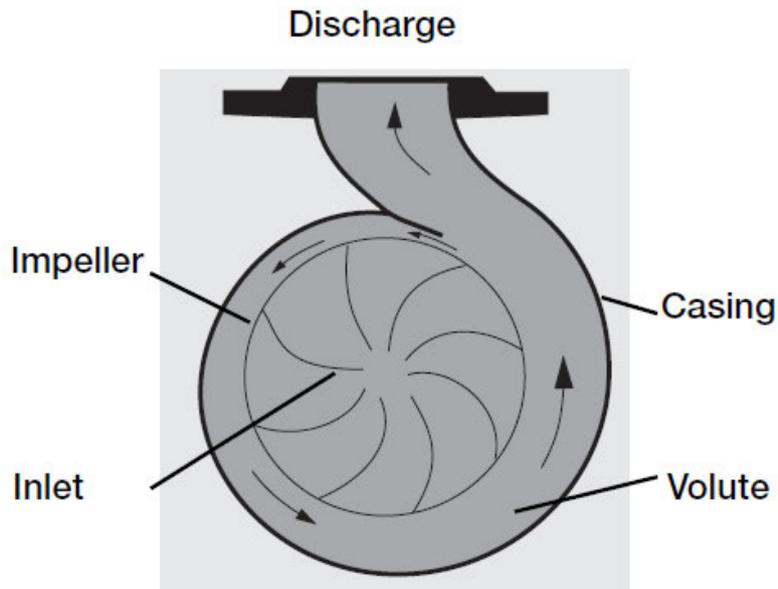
Single volute centrifugal pump casing and impeller (ABB, 2006).
